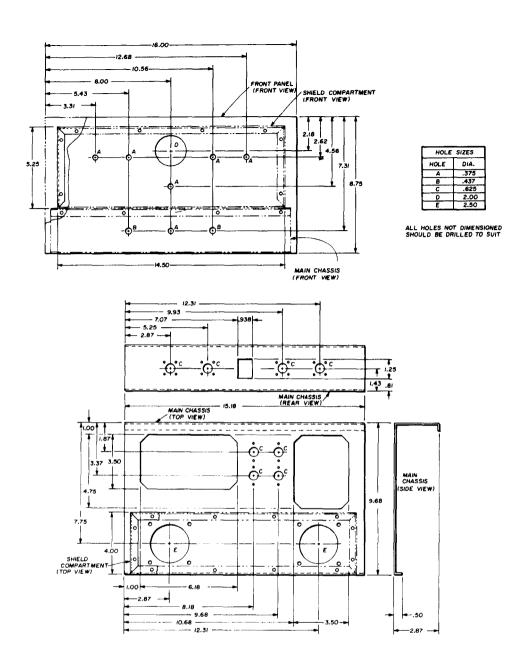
Mechanical construction details of the 6- and 2-meter transmitter chassis.
